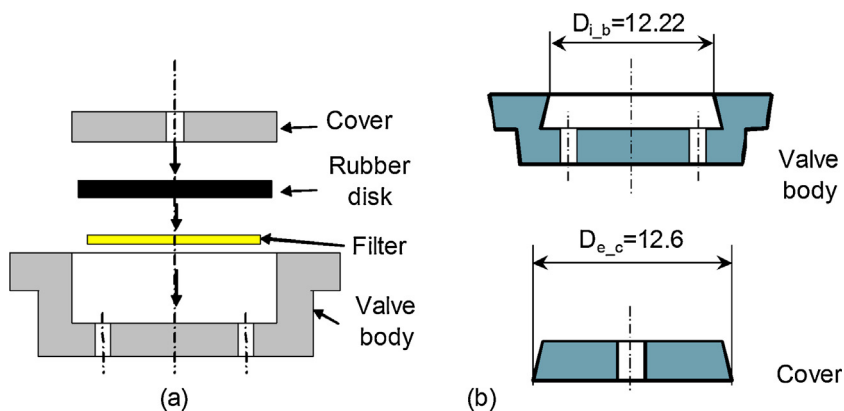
(a) General scheme of the valve, (b) sketches of the valve body and of the cover with related coupling dimensions (dimensions in mm).
